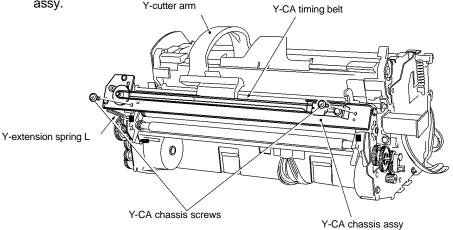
Removing the Y-CA Chassis Assy
